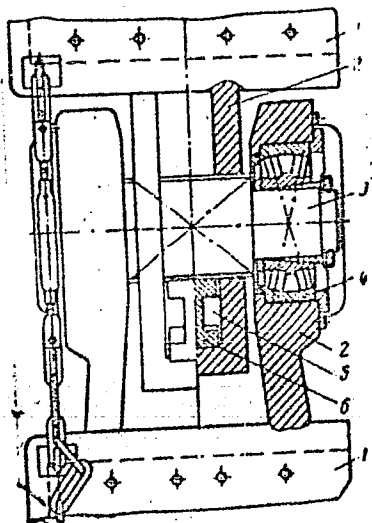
1- pontoons; 2- brackets; 3- hinge axis; 4- radially-spherical bearings; 5- slot; 6- wedge
